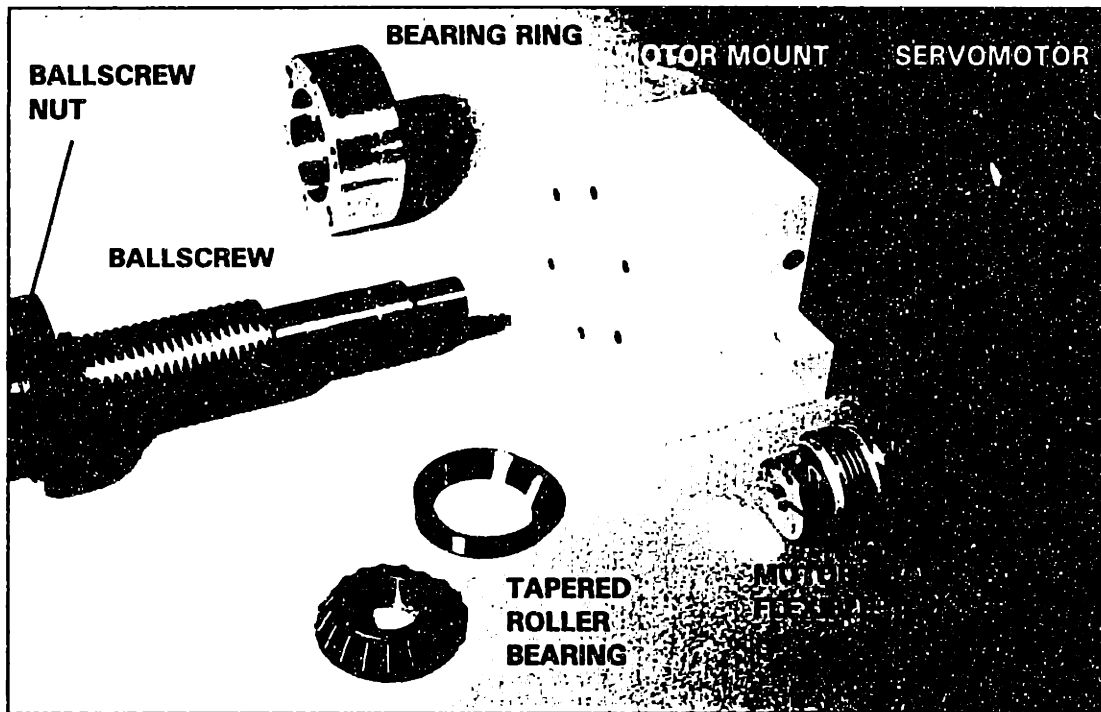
Infeed actuator components before assembly. The full assembly includes another set of tapered roller bearings and several socket head cap screws.
